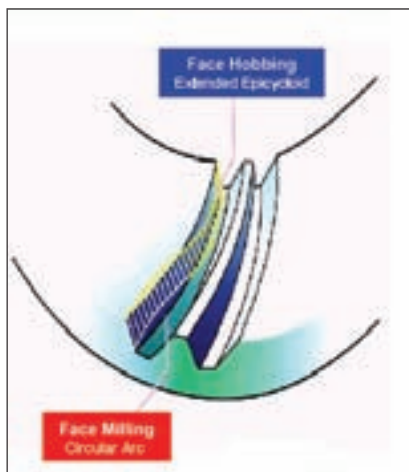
Face hobbed gears have an epicycloidal shape along the face width while face milled gears have a circular arc along the face.
